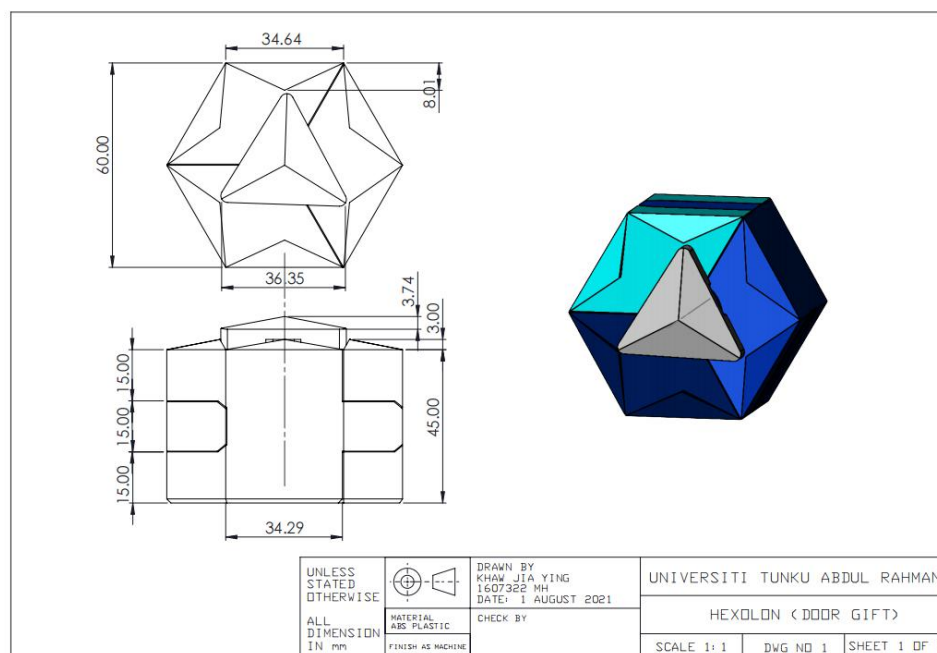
Technical Drawing of Door Gift (Hexolon)
